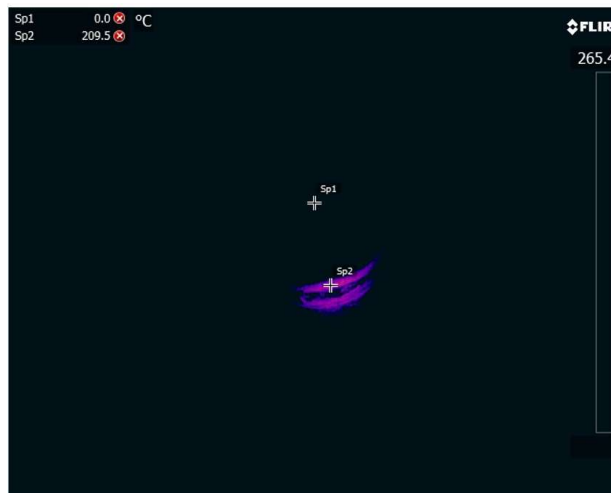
Sample 4 Frame at Weld Start
